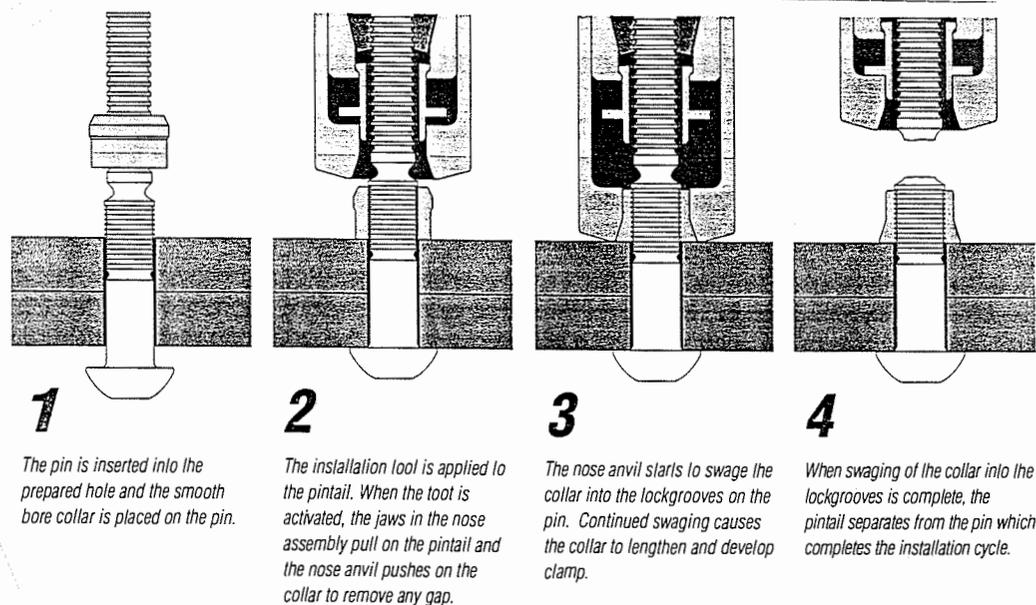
Operation of lock-pin and collar system. Courtesy of Huck manufacturing company. The LPC Fasteners used on this project were manufactured by the Huck Manufacturing Company.
